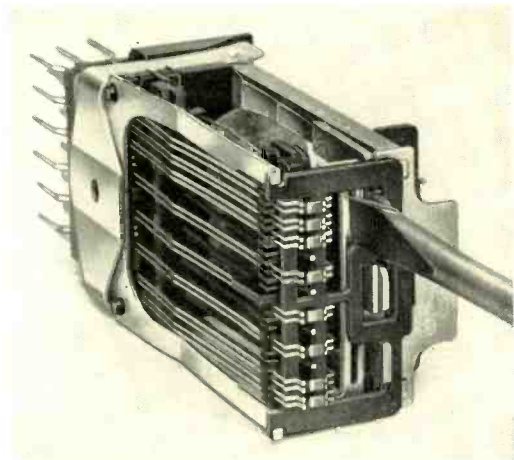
(b) – Contacts may be gang adjusted by bending the arms of the core plate with a screwdriver.
